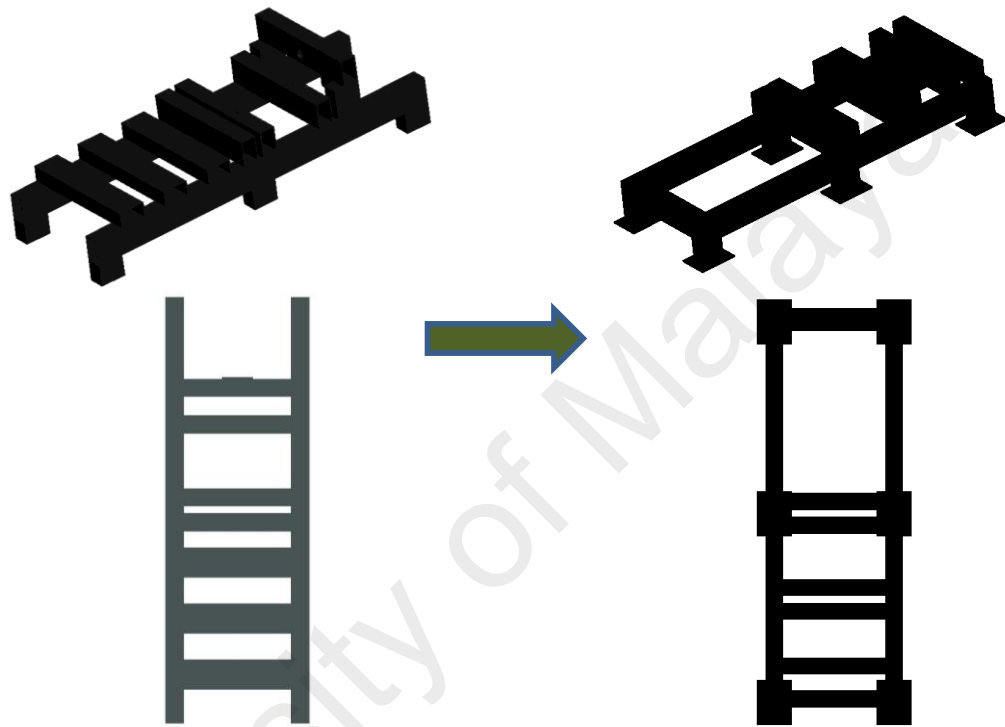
Test rig chassis, old chassis (Left) and new chassis (Right).
